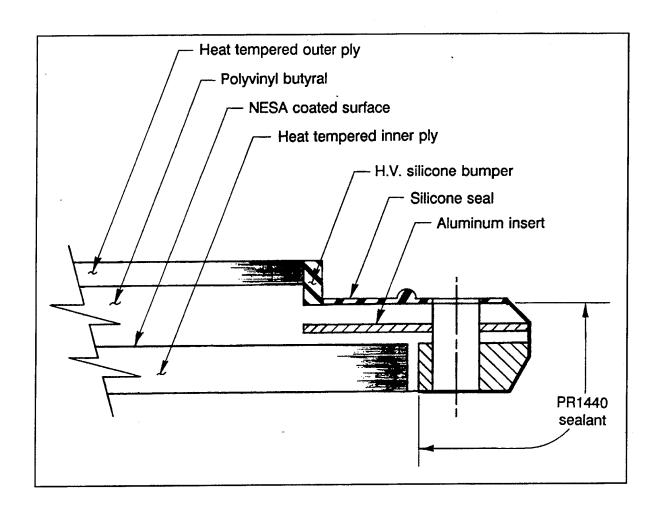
C/KC-135 #4 W/WS Cross-Section
